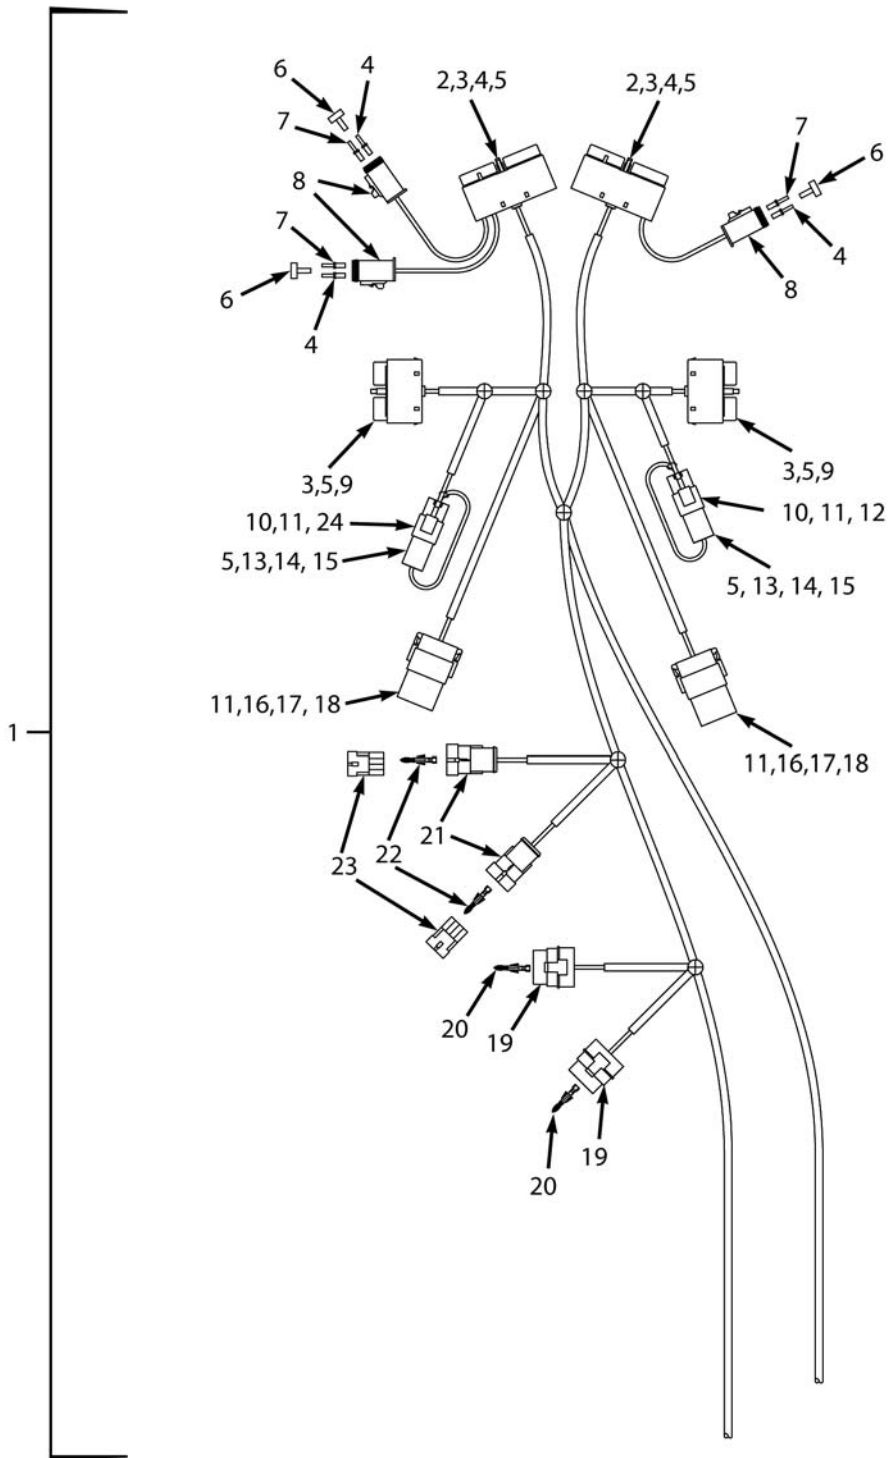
CONTROL VALVE HARNESS (SHEET 1 OF 3)
